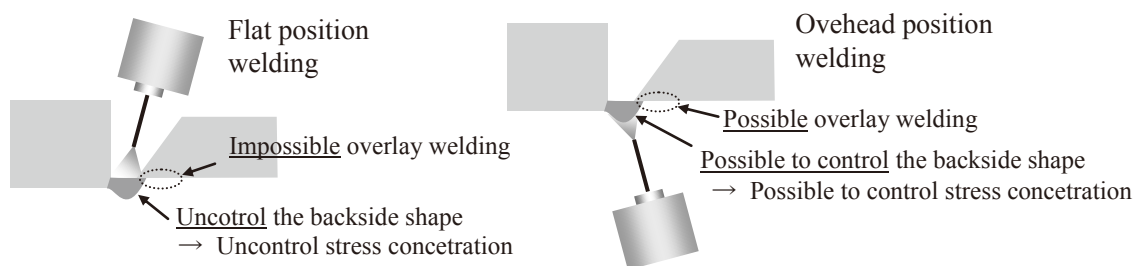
Advantage of overhead position welding the lower face of flange
